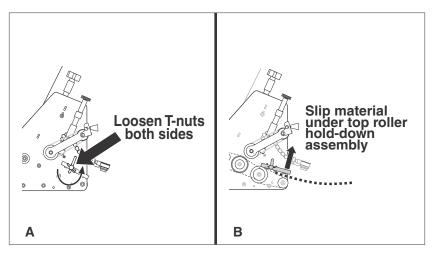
Adjusting Top Roller Hold-Down Assembly
